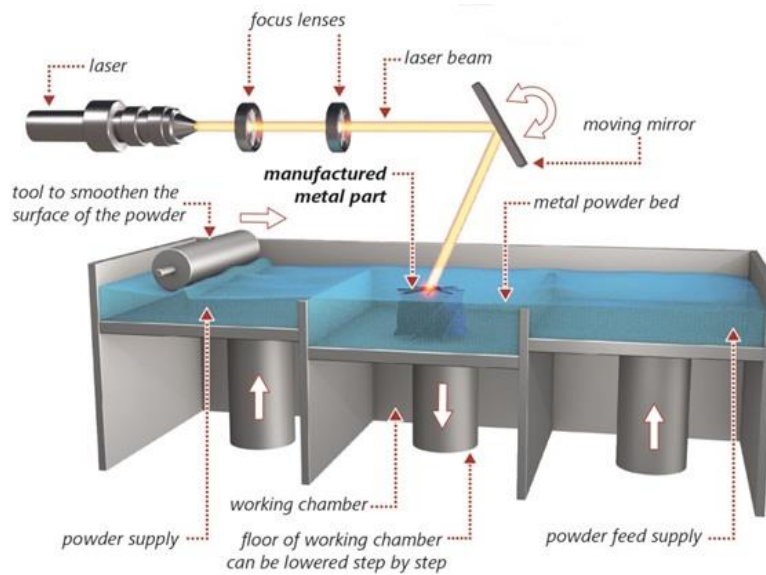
Schematic of the printing process using SLM technique. The powder is supplied by independent chambers and a smoothing tool. The manufactured part is placed in the working chamber with a platform that is lowered as the layers are printed. A mirror directs the laser beam to melt the particles according to the CAD file ^[32].
